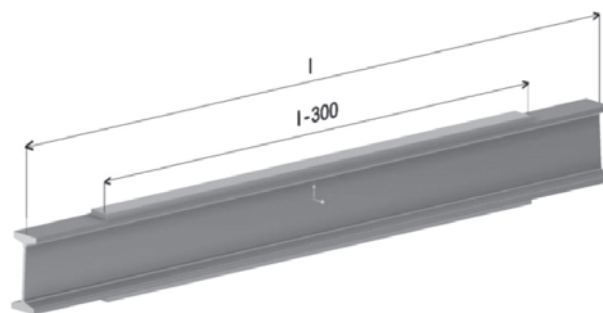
Rail 155 reinforced using flat bars welded to the outer surfaces of the lower and upper part
